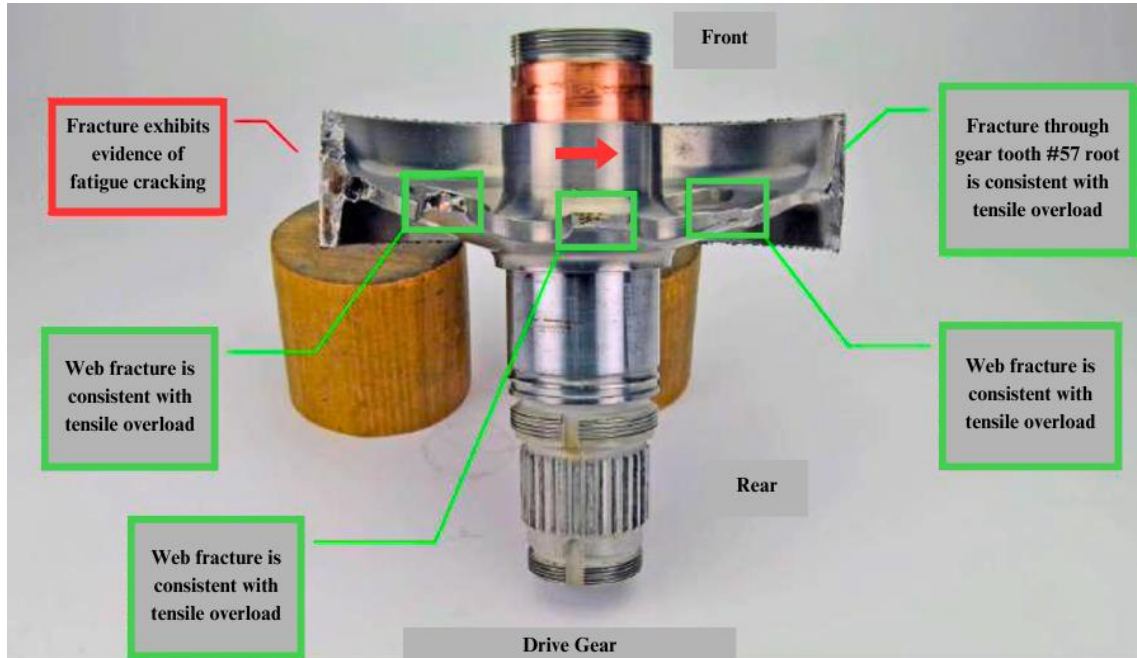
Detailed view of the fractured output drive gear from the reduction gearbox [210].
